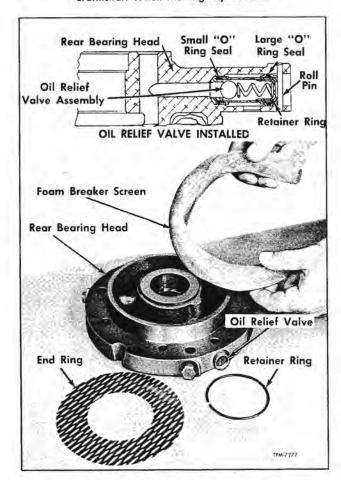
Foam Breaker Screen Removed and Oil Pressure Relief Valve Assembly Installed
